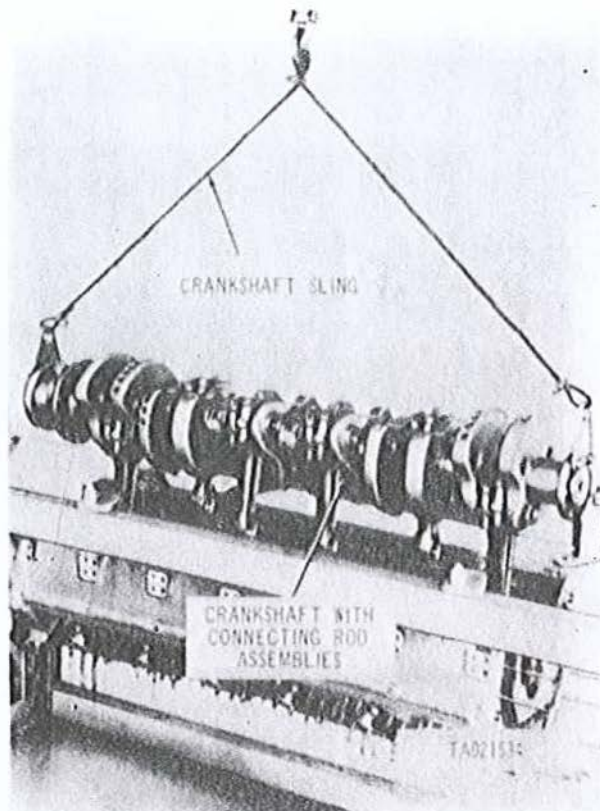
Removing or installing crankshaft and connecting rod assemblies using crankshaft and connecting rod sling.
